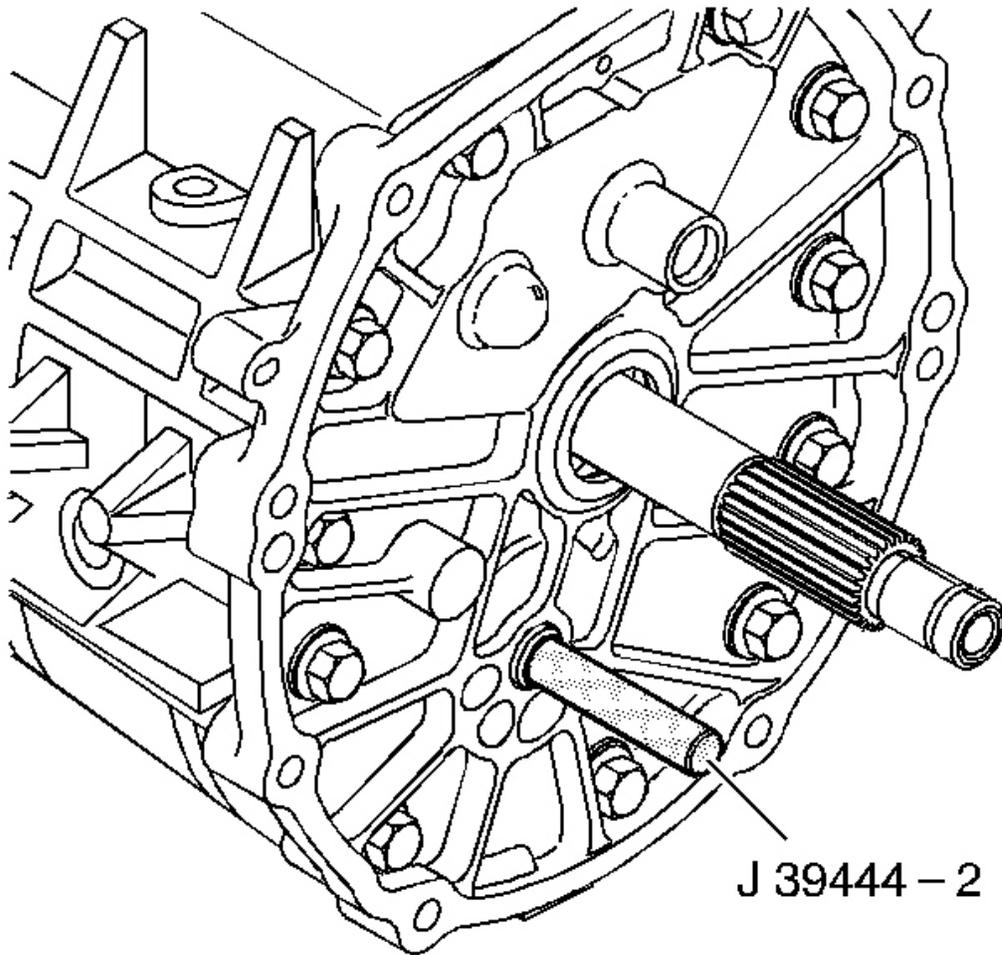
Installing/Removing J 39444-2 In Adapter Plate Plug Hole
